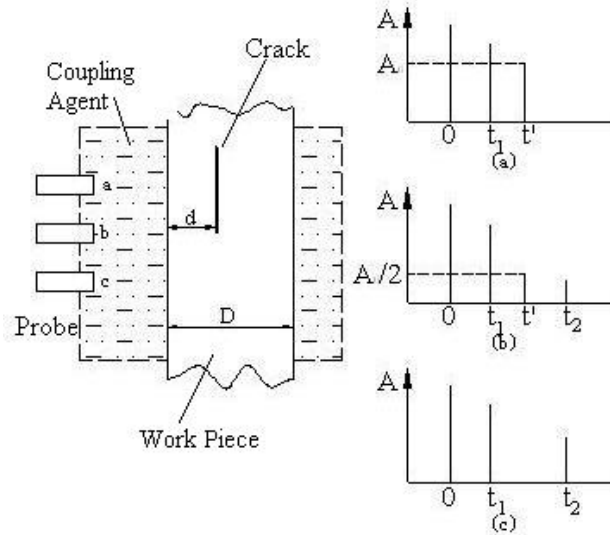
Principle of crack detection using ultrasonic pulse-echo technique
